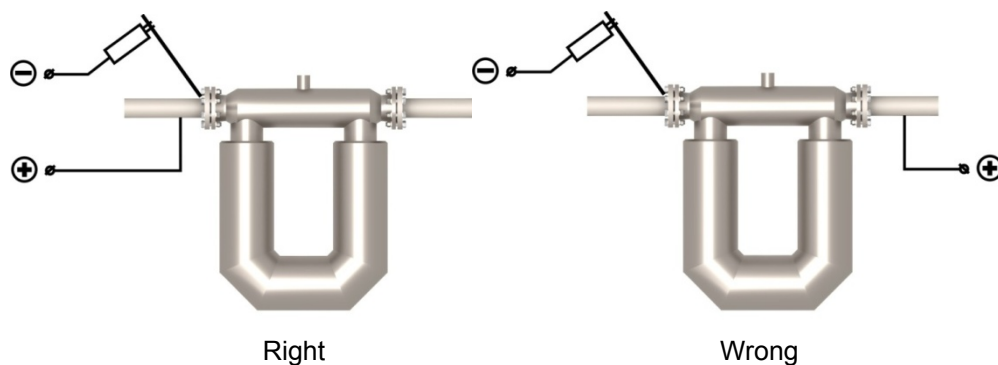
Connecting the power source for arc welding using the flowmeter
